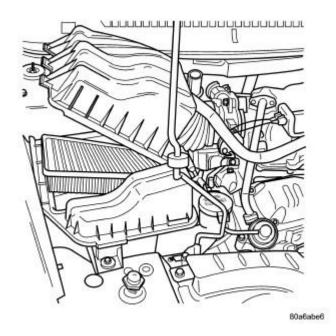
Air Cleaner Element and Housing Cover Courtesy of CHRYSLER LLC
